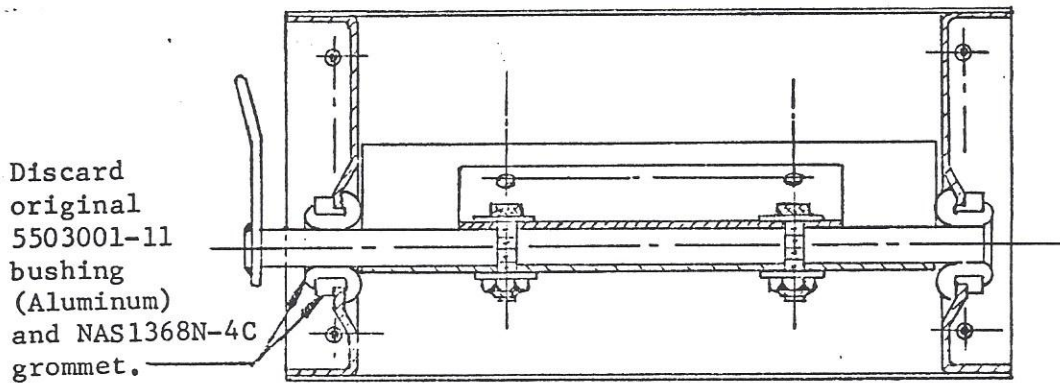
Section AA - Original Airbox Design with valve and bearings installed. (AA5-0071 thru AA5-0573)
